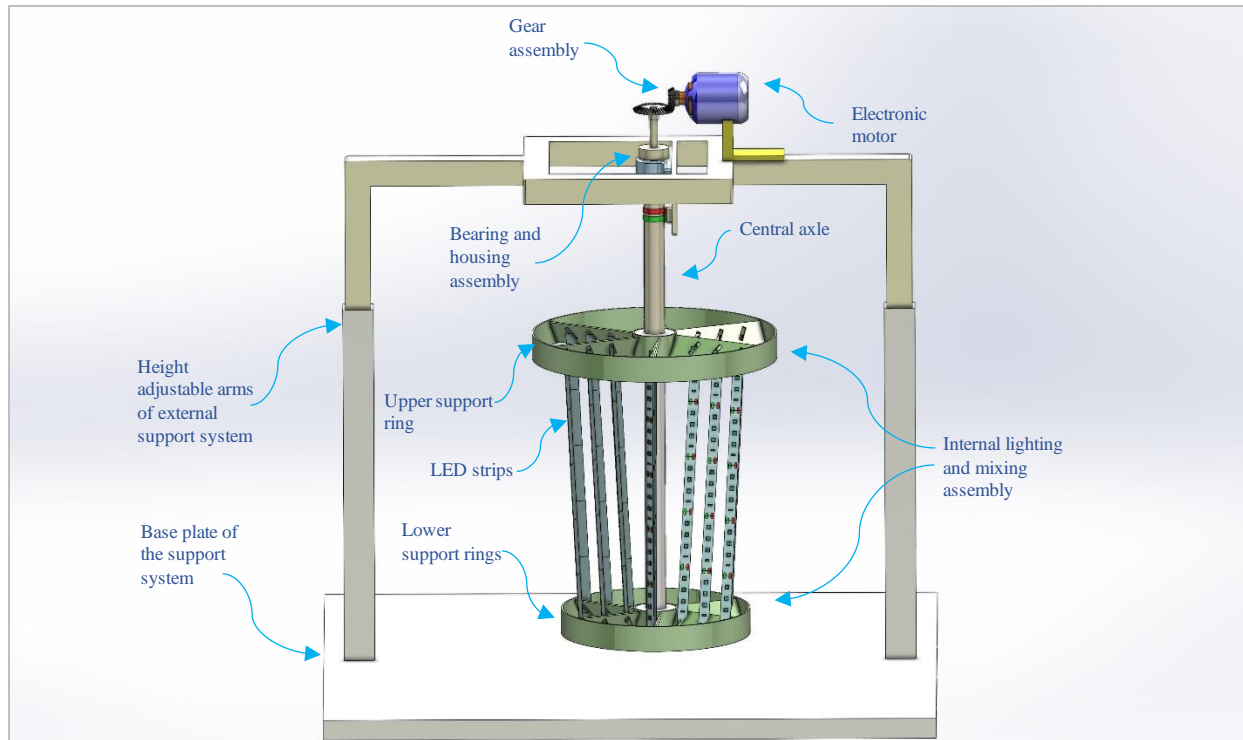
A.3: Schematic of lighting and mixing assembly fixed to the external support system using bearing and housing assembly.
